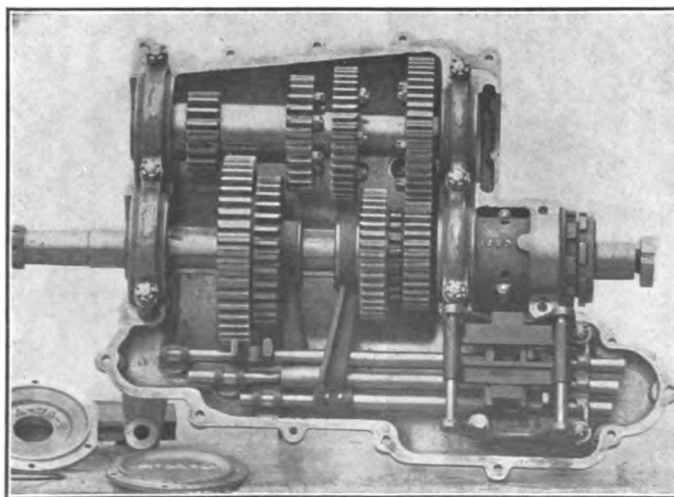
Four-speed selective sliding gear transmission, with annular type ball bearings, and selectors within same housing
